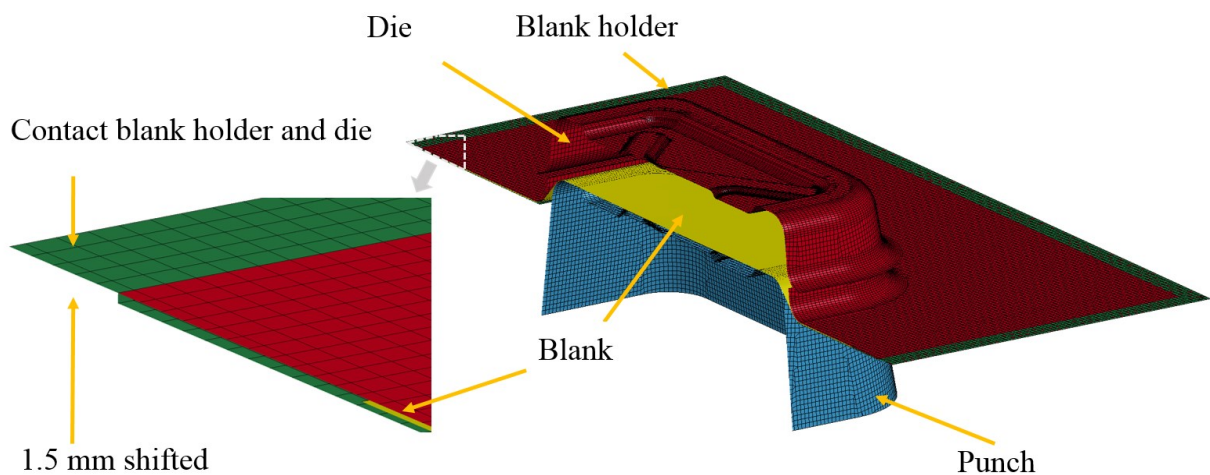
left: contact situation blank holder and die; right: sectional view - forming model
